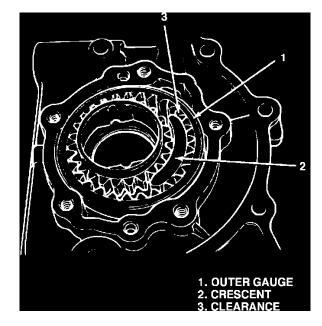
Checking oil pump gear radial clearance. Rotory type similar
